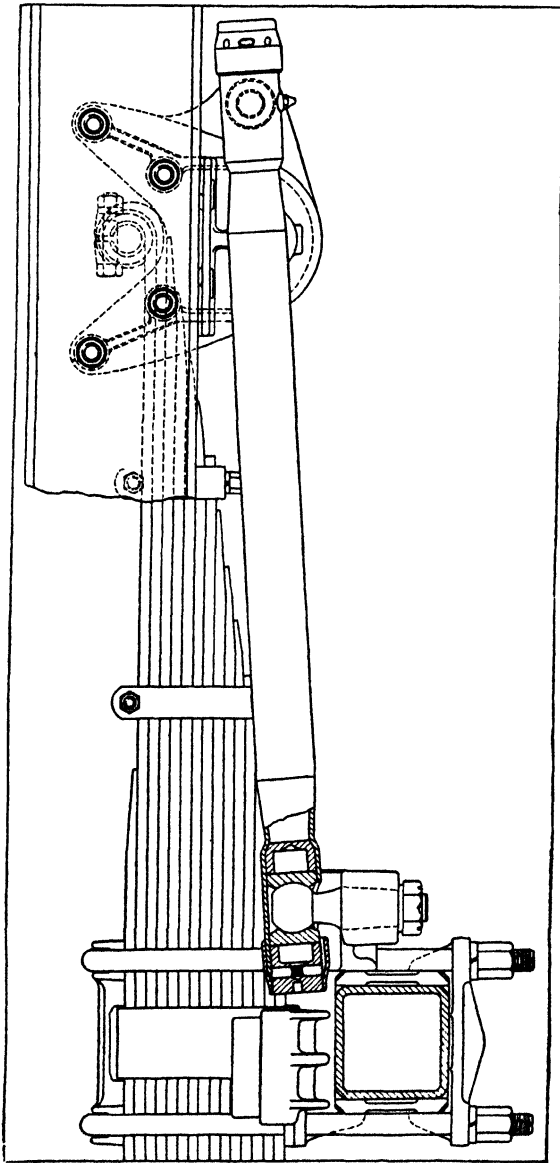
TUBULAR RADIUS ROD EXTENDING BETWEEN BALL STUDS ON SPRING PAD ON AXLE HOUSING AND ON SPRING BRACKET ON FRAME RAIL.
